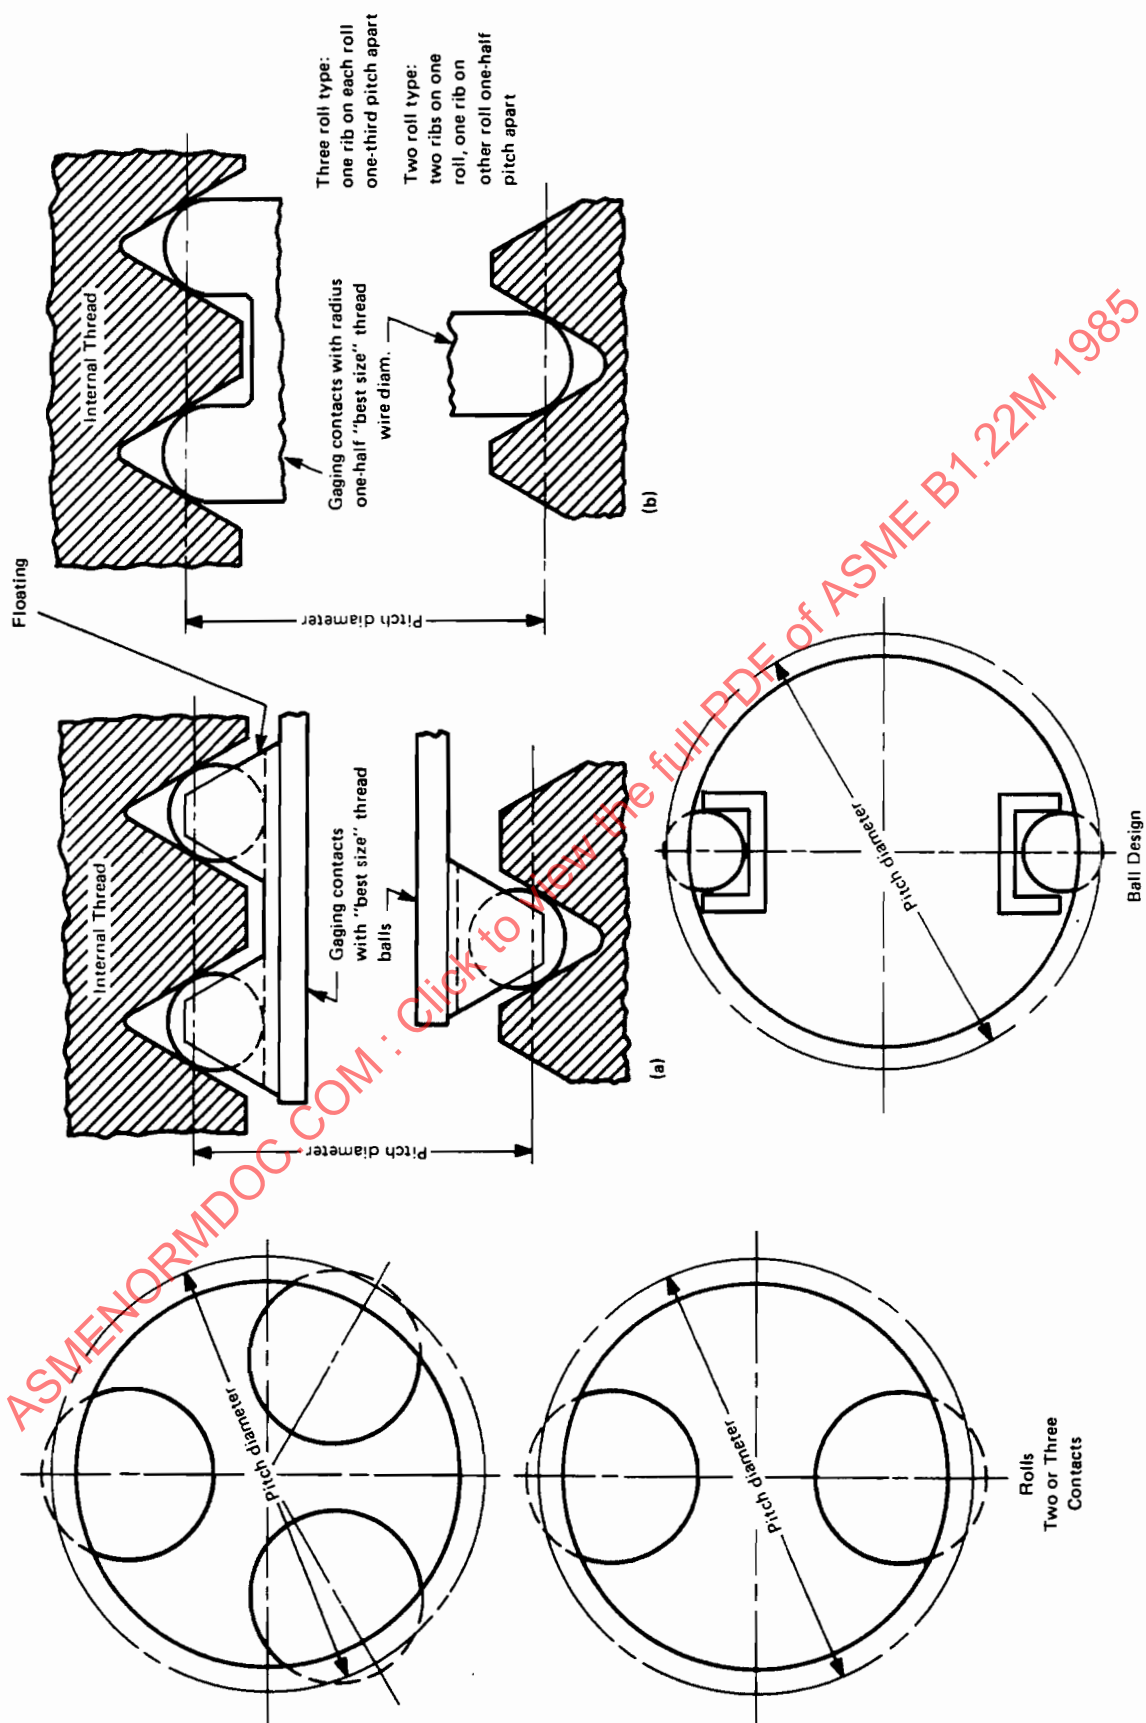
INDICATING THREAD GAGES — MINIMUM-MATERIAL PITCH DIAMETER LIMIT AND SIZE — BALL AND RADIUS
